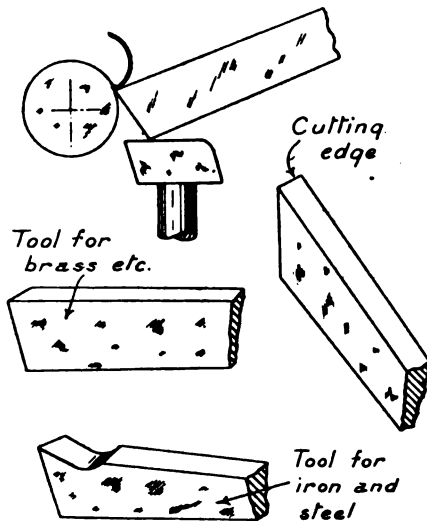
TOOLS FOR PARTING WORK IN THE LATHE.
